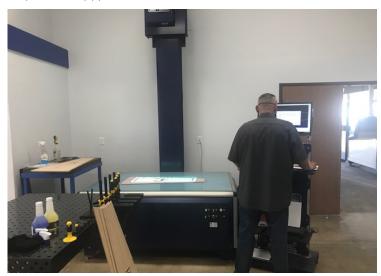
Employee measuring a part at Serra Laser & Waterjet
